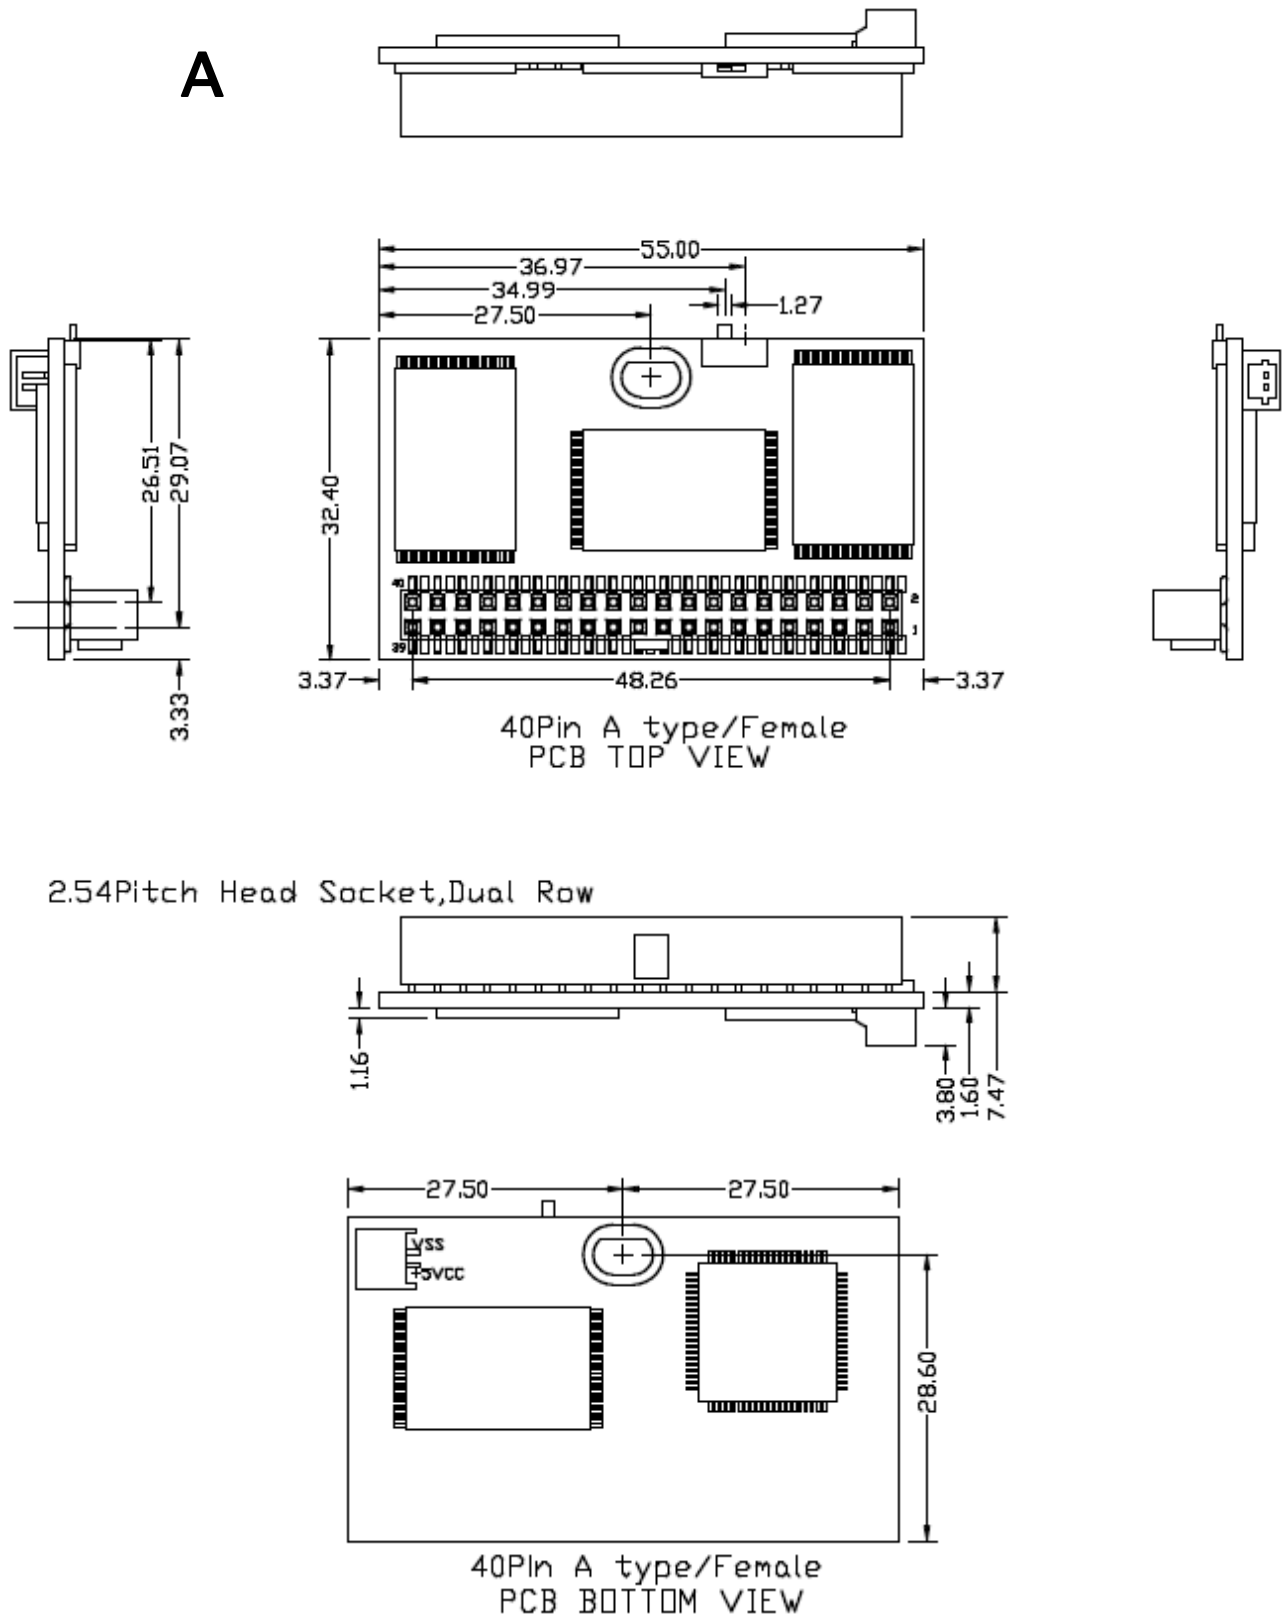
Mechanical Dimension of EDC4000 40-pin (Horizontal Female Type A)
